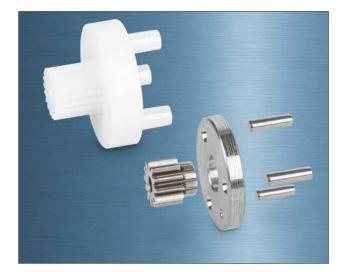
Planetary carrier made by CIM: simply one part instead of an assembly of five parts
